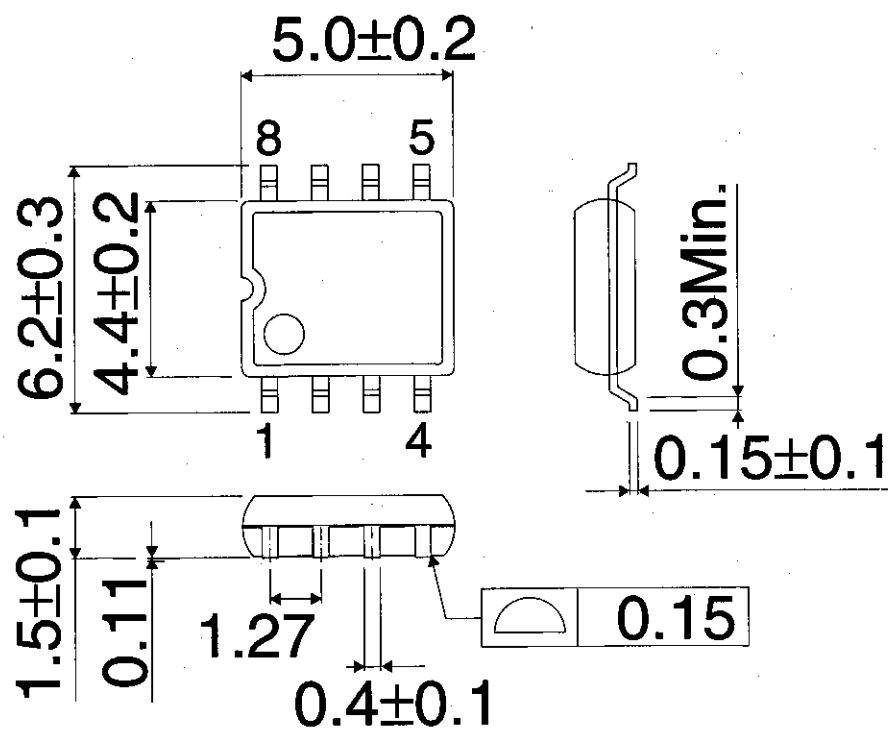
Outline Dimensions SOP8(BR9020F-W)
